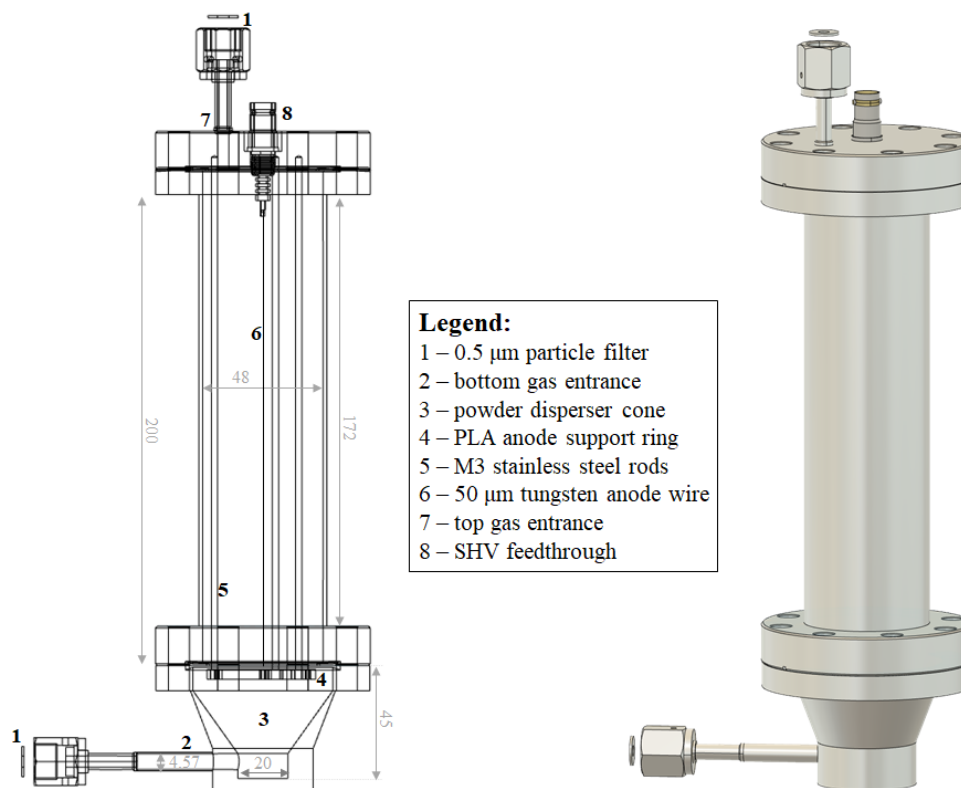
Technical drawing of the neutron aerosol detector prototype (dimensions in millimetres).
